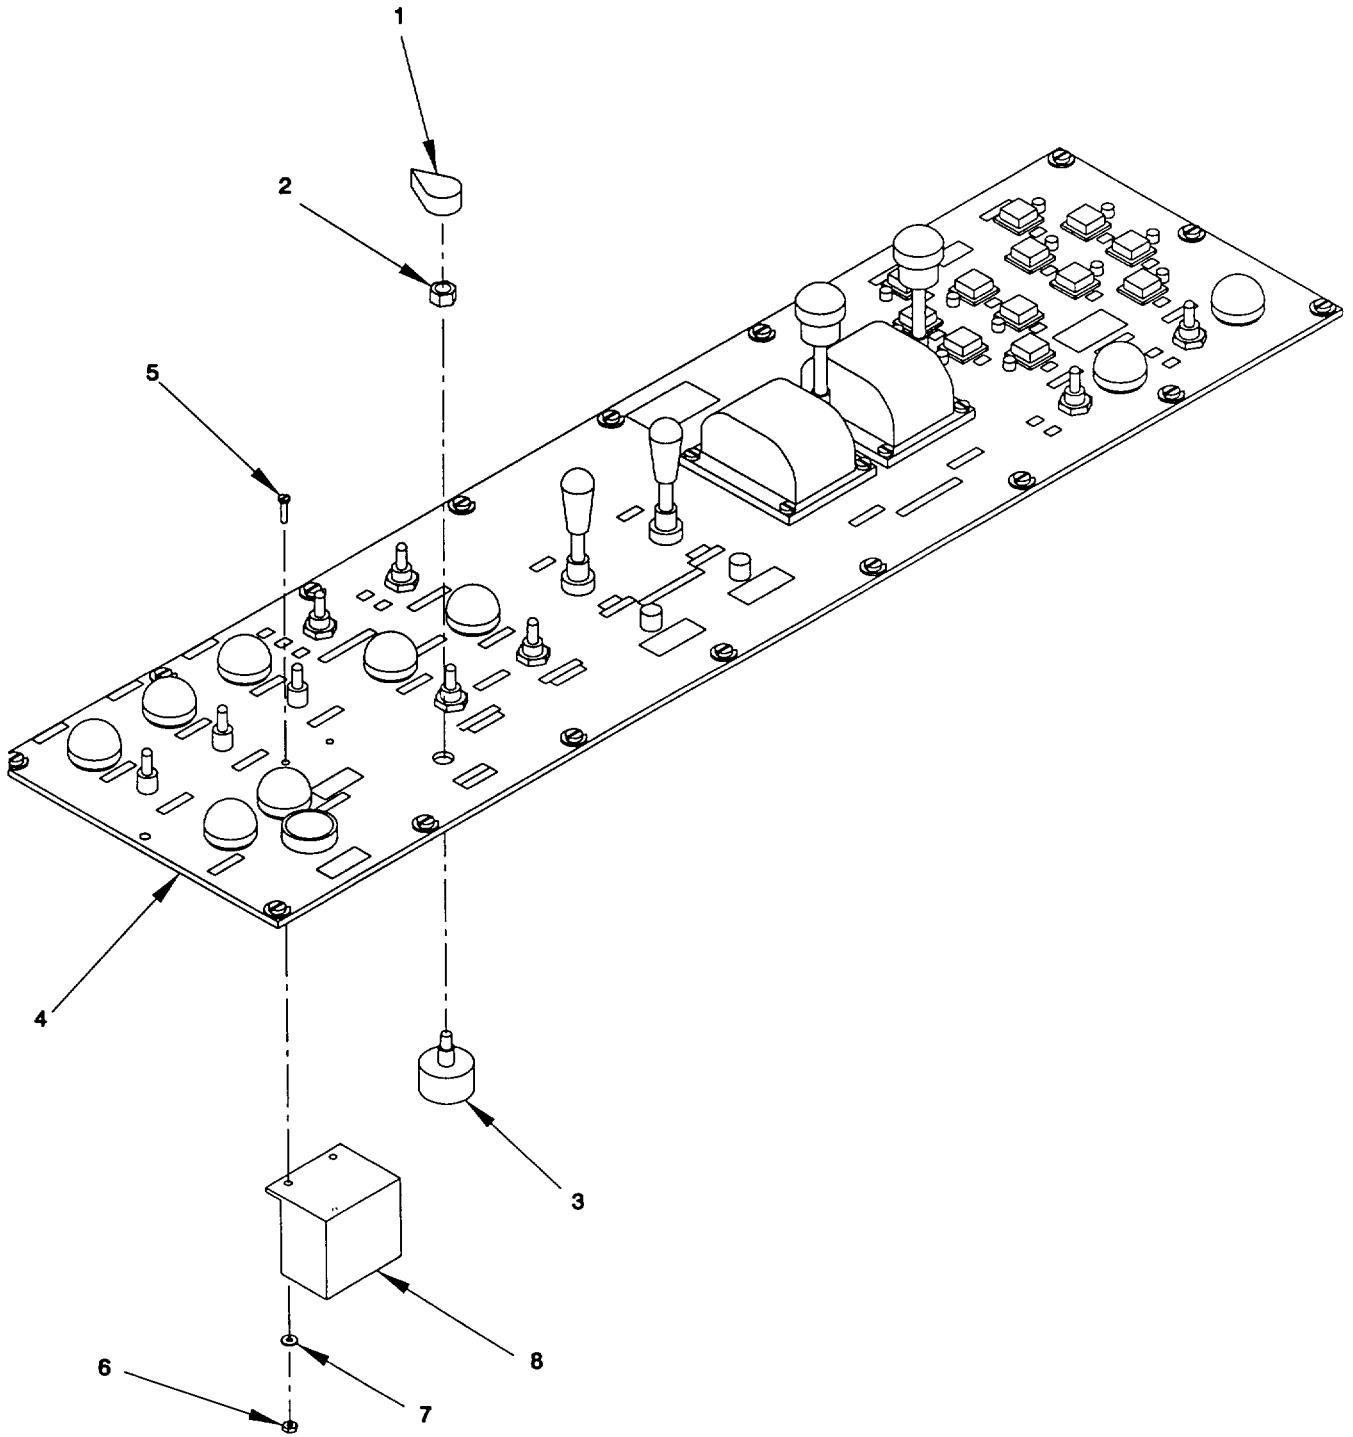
Dimmer, Lower Control Panel "A2", Remove/Install.
